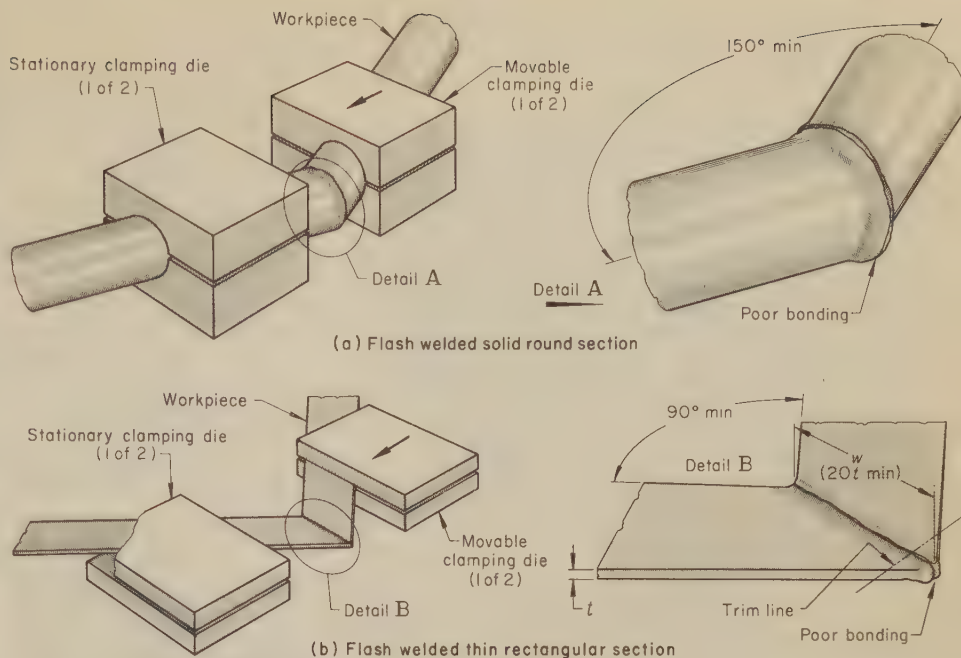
Setups and dimensional relations for flash welding of miter joints in round and thin rectangular sections. Poor bonding at outer corners results from lack of backup metal.
